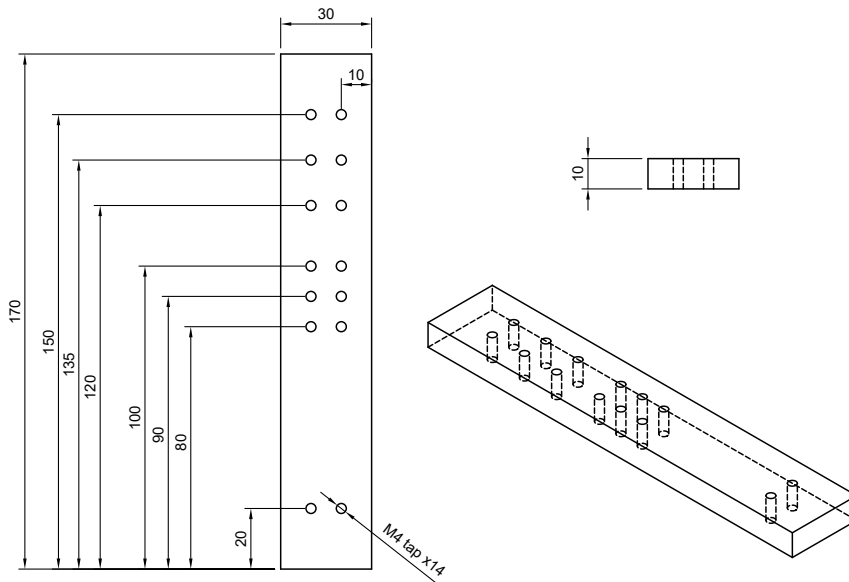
Technical drawings and dimensions of base plate used to clamp all parts and enable transitioning between measurement designs
